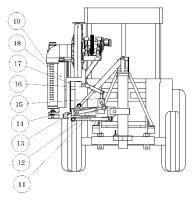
Frontal view of the prototype for leaf removal developed for the grapevine.
